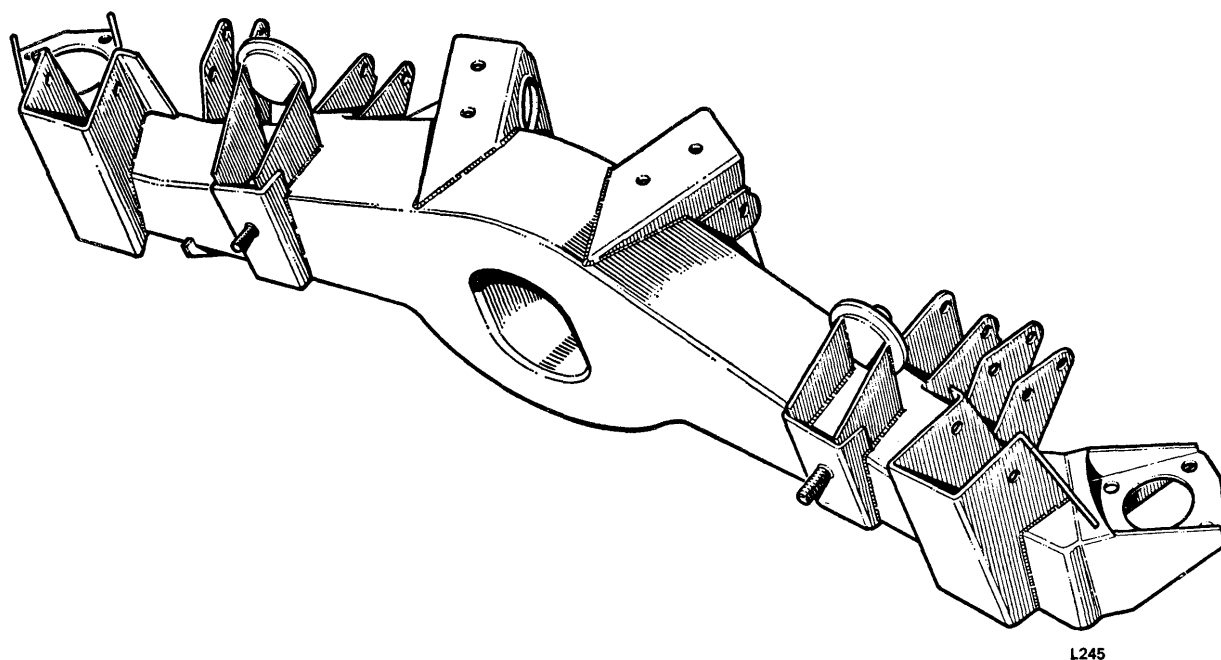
VIEW OF REAR SUSPENSION CROSS-MEMBER
